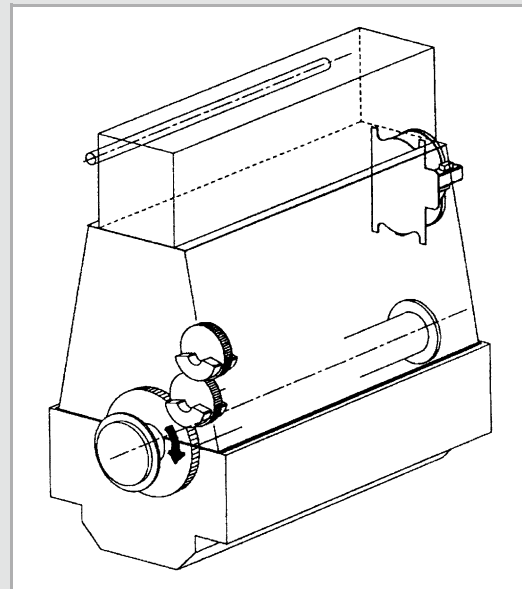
Balancing of the second order moment by electrically driven unbalancers arranged on the free engine end and gear driven unbalancers on the driving end
